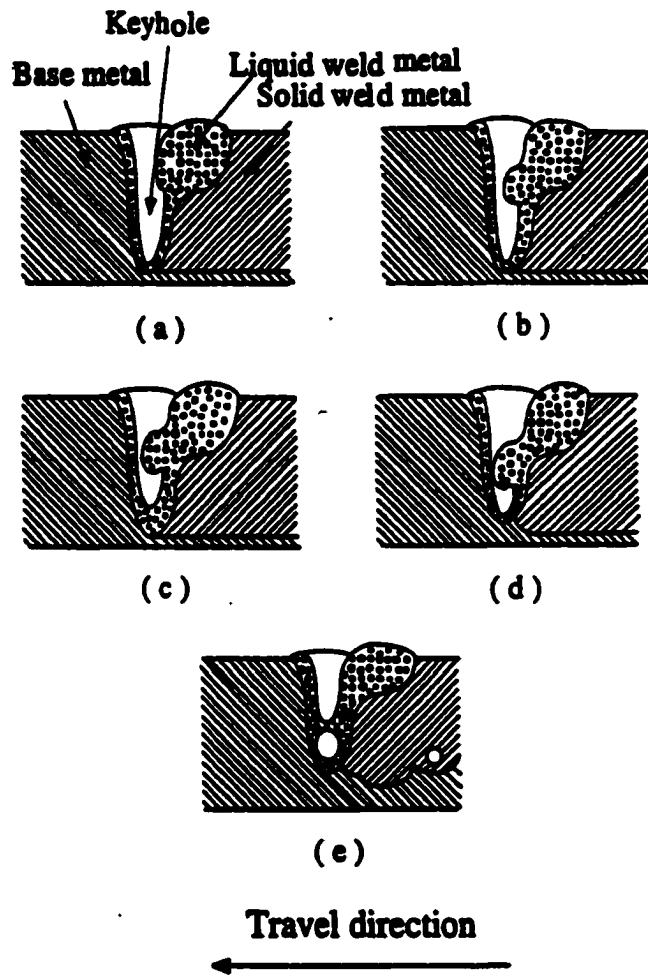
A schematic diagram showing the formation of void at the weld root due to imperfect collapse of the keyhole [146].
